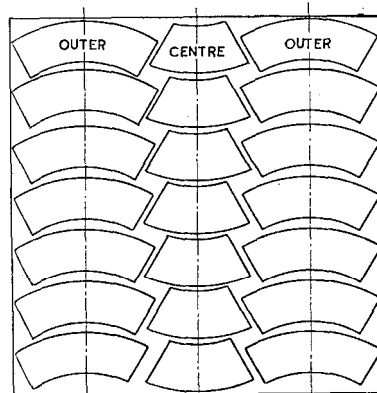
Making a six-spoked wheel pattern on the lathe faceplate. Below, left: Fig. 37. Set of rim segments cut from single piece of wood Right, Fig. 38: Way of joining the six spokes
